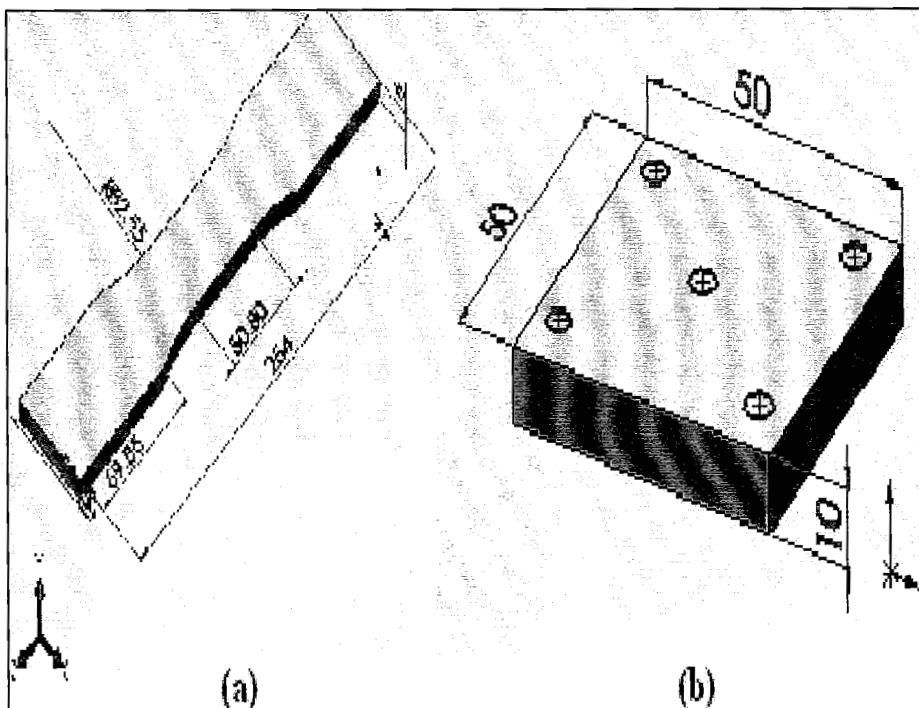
Dimension of the Test Specimen (a) ASTM E1037-72a (b) ASTM E18
